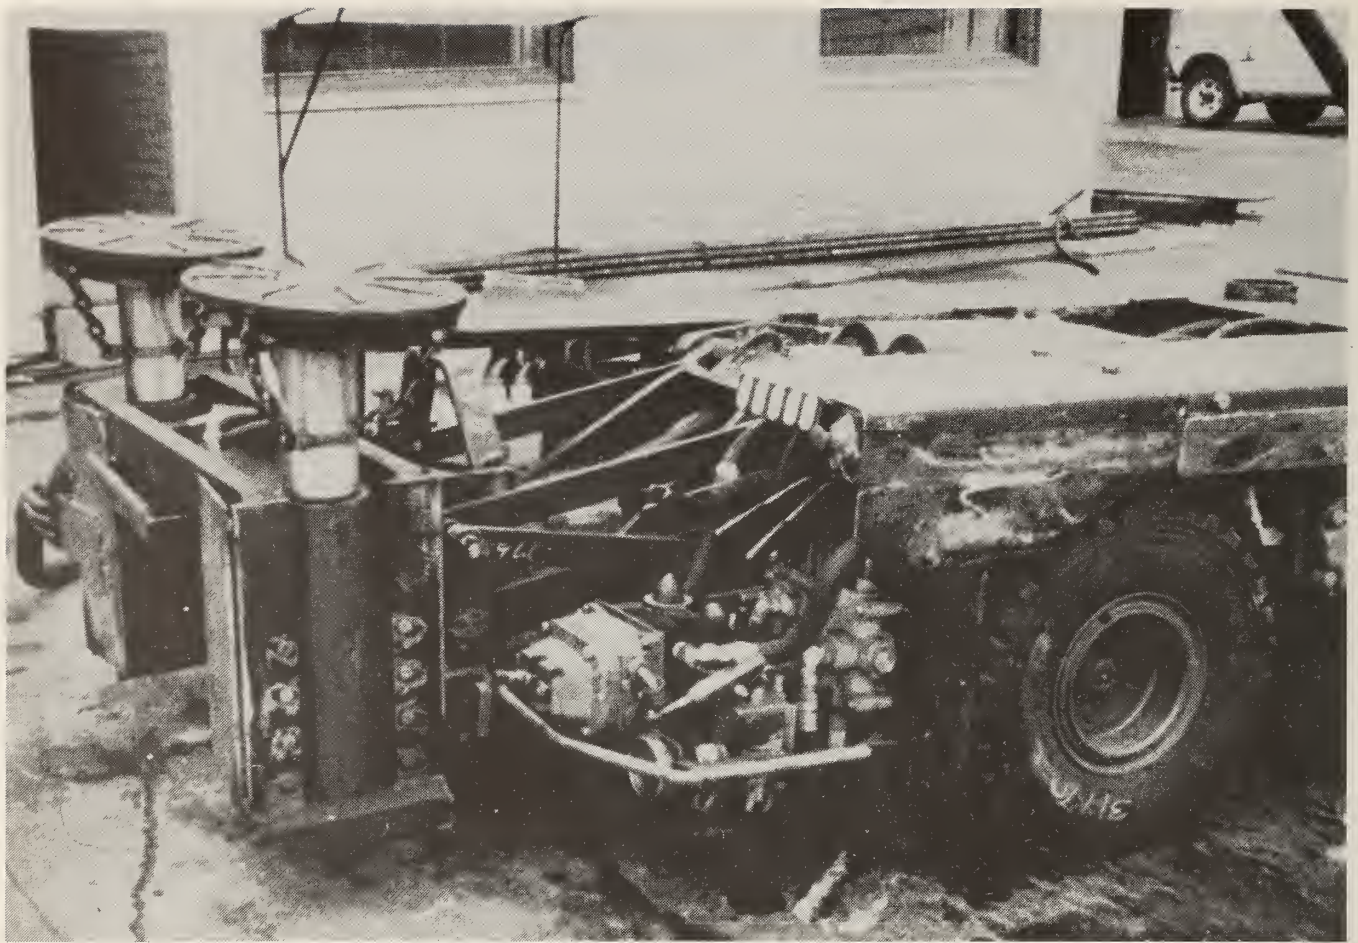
Lift arm weldment repositioned beneath ATRS stand.
